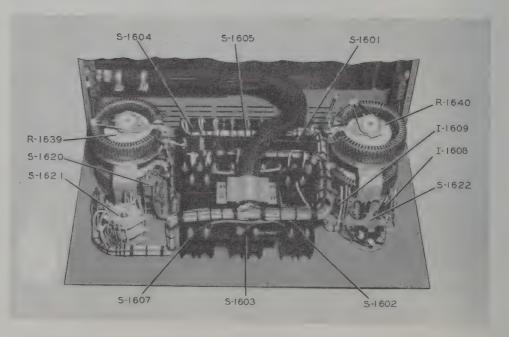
Power Supply Assembly PP-1089/FRT-22, Lower Control Panel, Rear View.
